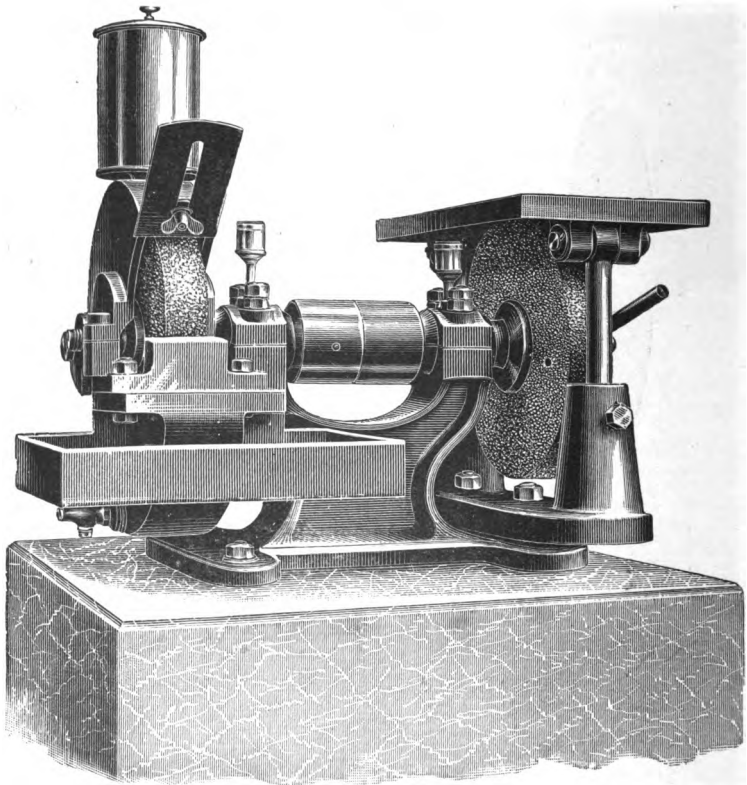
Mechanic's Tool and General Grinder. London Emery Works Company.
